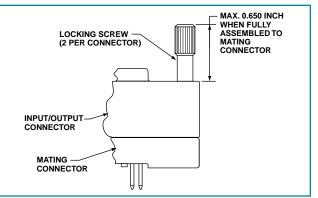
I/O LOCKING SCREW DIMENSIONS
